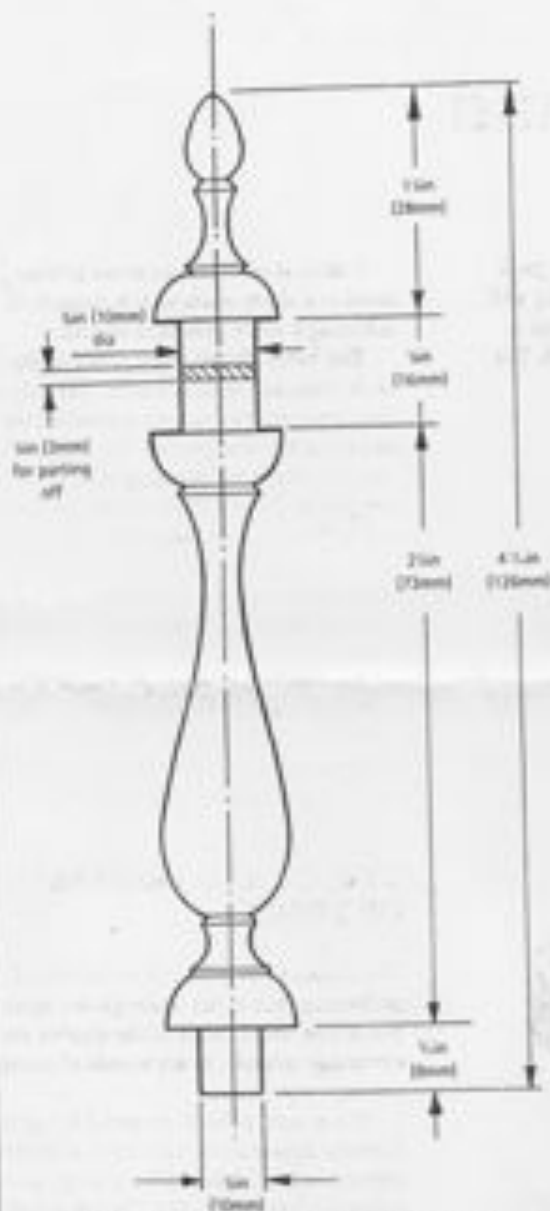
Dimensional and constructional details of carrying stand pillar.
